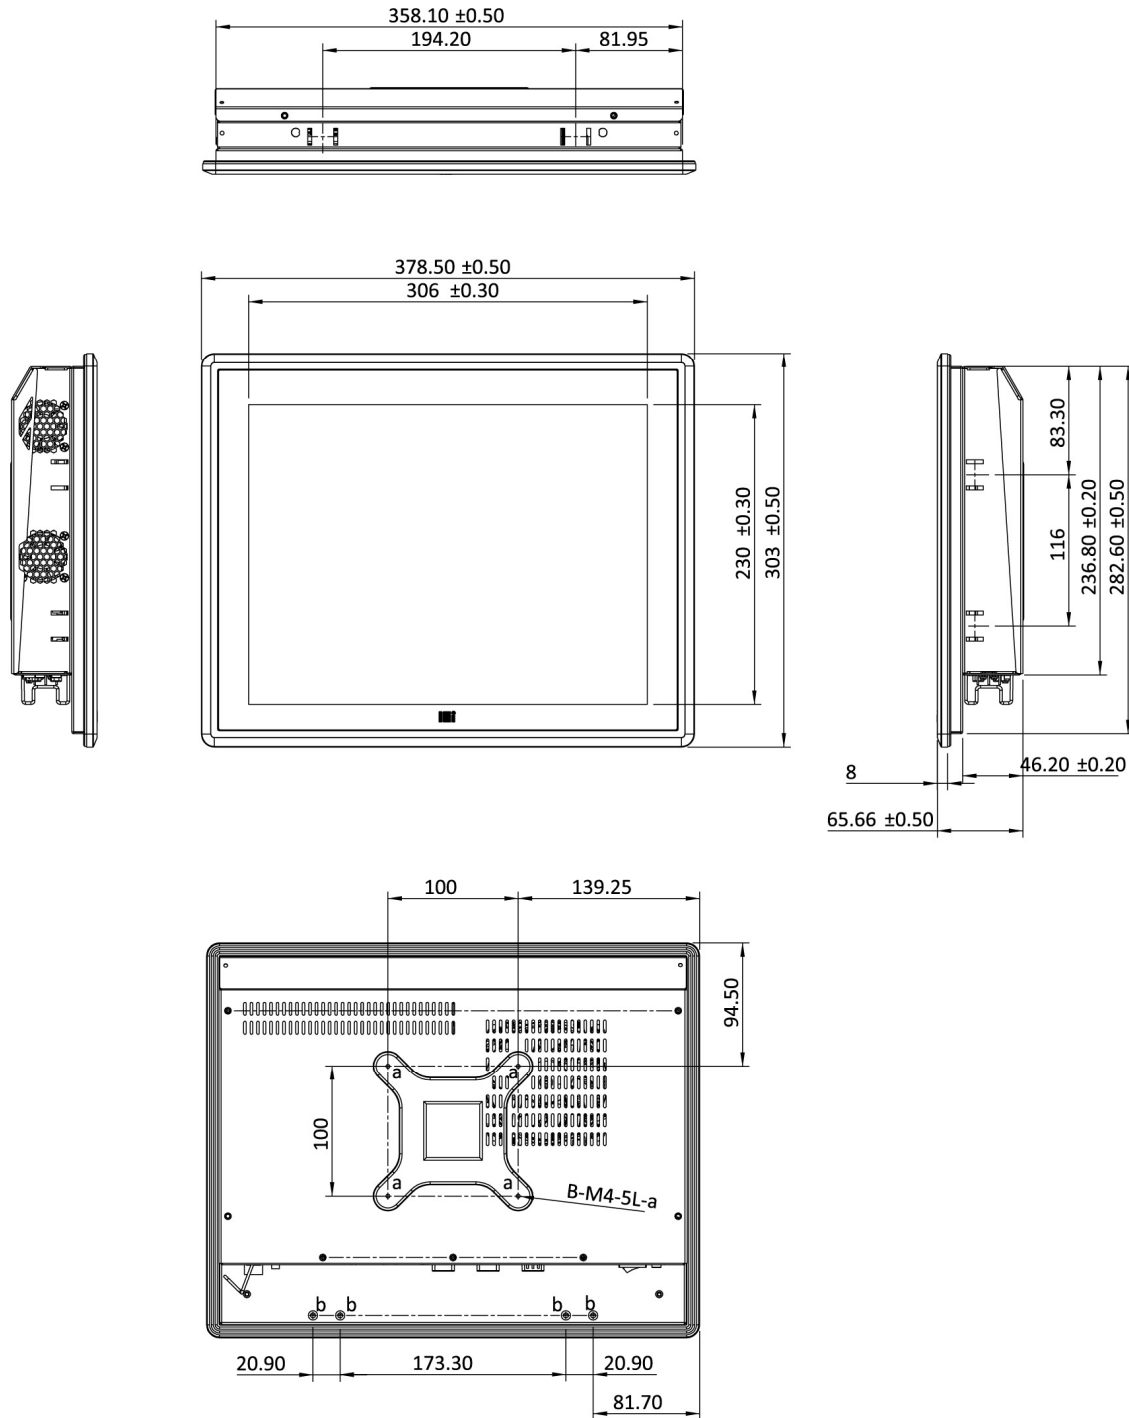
PPC-F15A-H81 Dimensions (mm)
